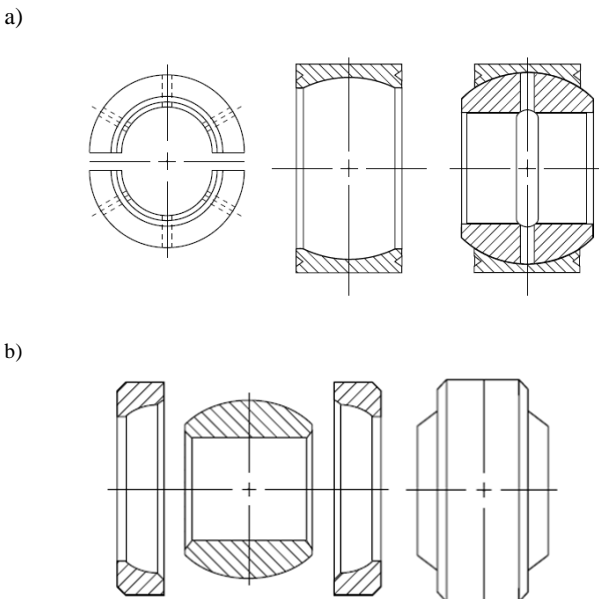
Split spherical bearing: a) Split ball bearing, b) Split race bearing
